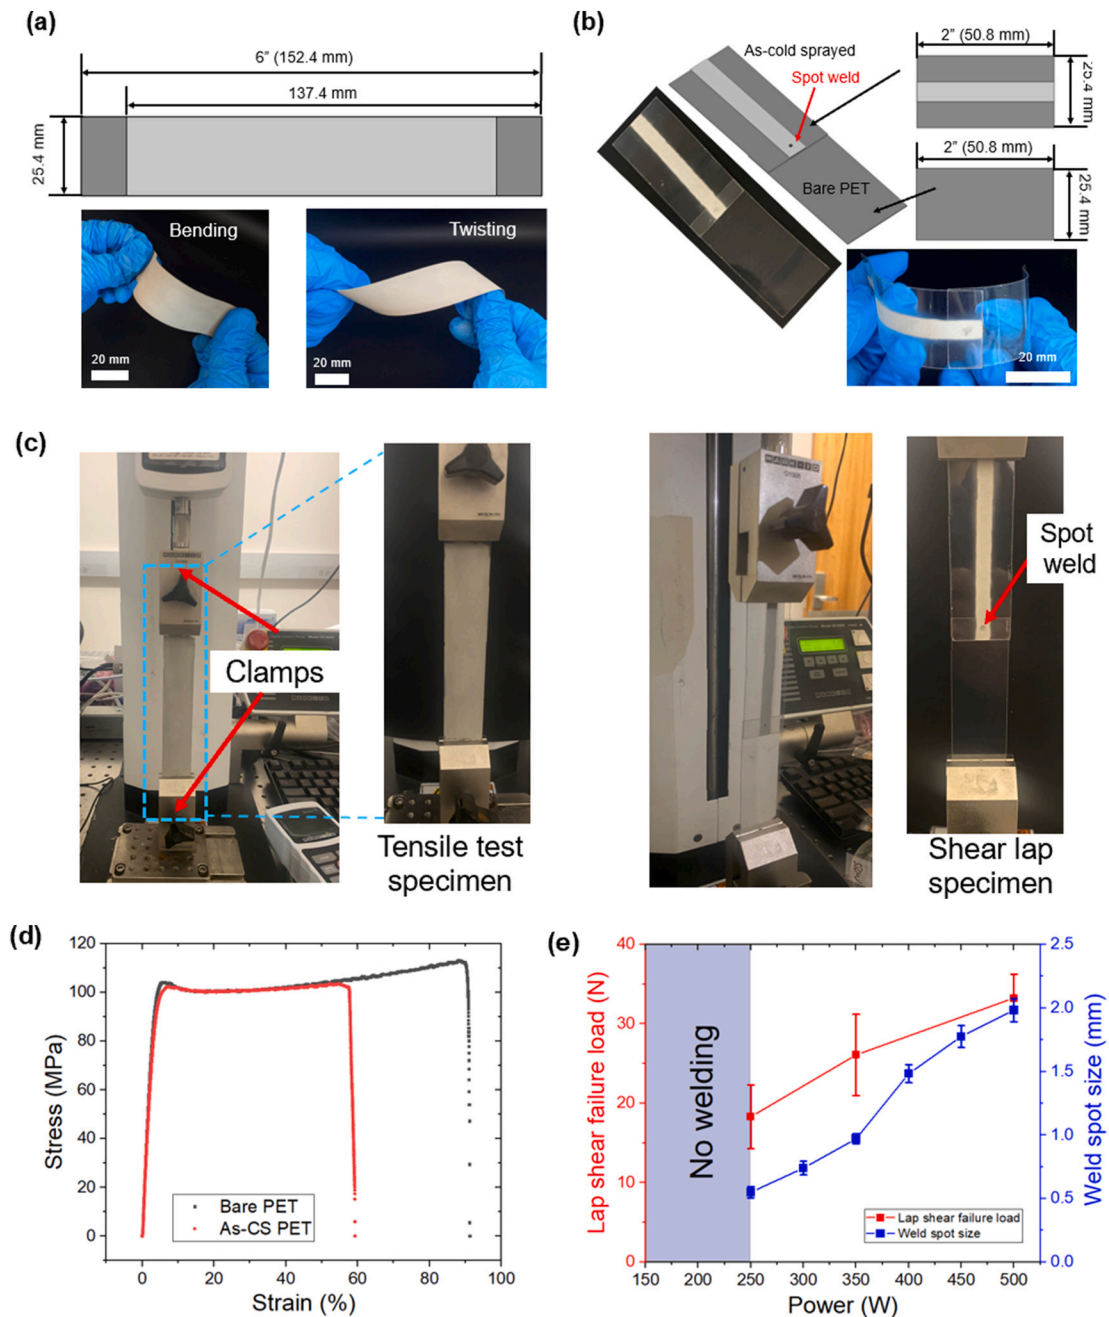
(a) Tensile test specimens; (b) shear-lap test specimens; (c) tensile test setups; (d) tensile test results for bare and as-cold sprayed PET samples; (e) lap shear strength and weld spot size variation at various ultrasonic welding powers.
